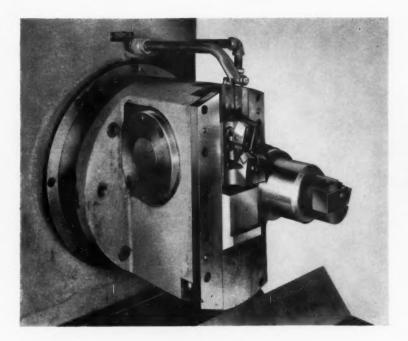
Stator end of air-conditioning compressor crankcase is bored, chamfered, and faced with this multiple-tool head, maintaining concentricity to 0.001 inch.
